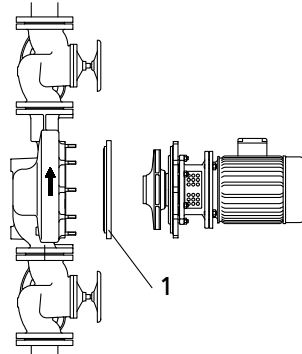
Horizontal installation with blind flange (1 = blind flange, accessory)
